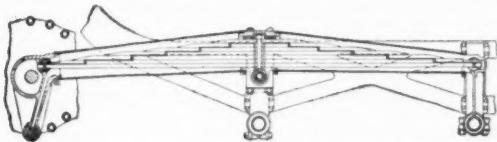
Fergus* cantilever spring enclosed in a boot and provided with oil channels for a regular system of oil circulation.
